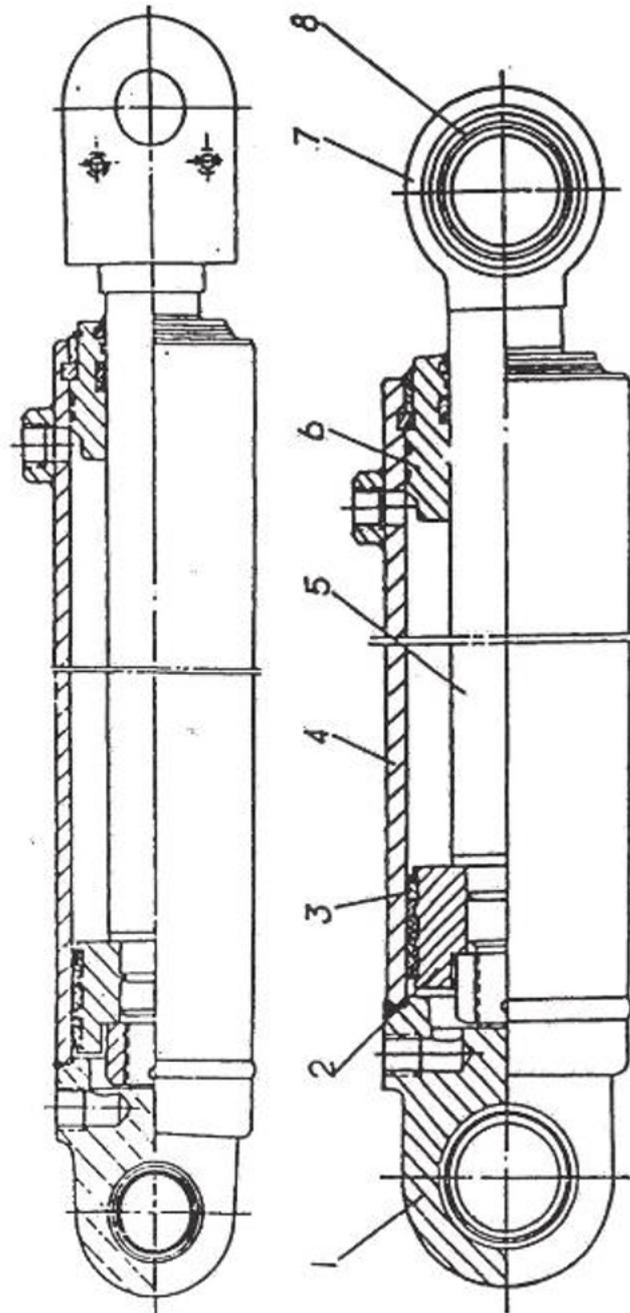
Illustration for Hydraulic Cylinder of Boom and Rotating Bucket
